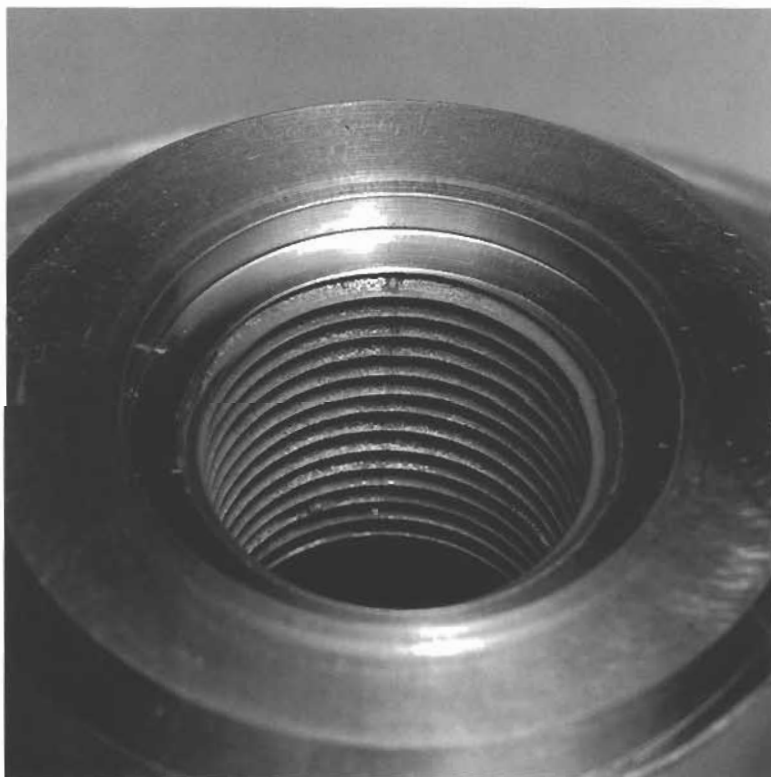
A crack in dirty threads. Threads need to be cleaned before the visual inspection begins. (See NOTE 9.)
